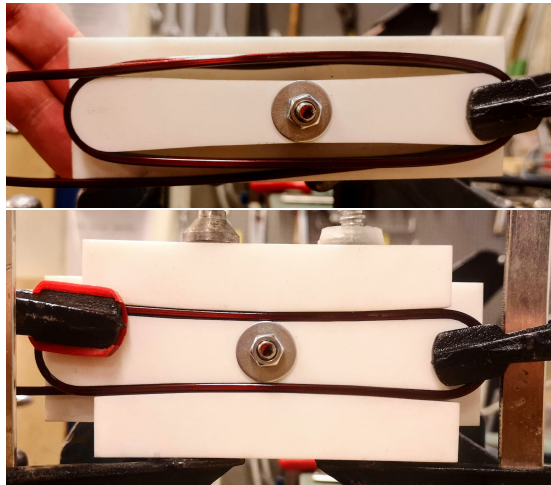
Photos of winding fixture. Above: Before pressing. Below: During pressing.
